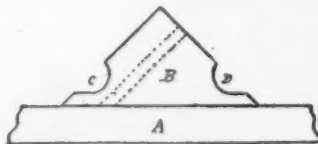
JIG FOR BORING AT AN ANGLE.
